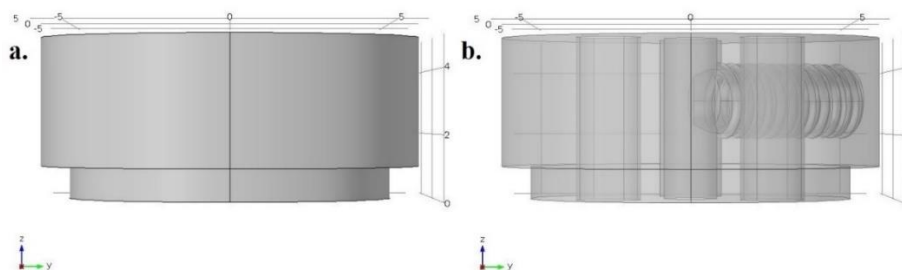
Schematic illustration of front view of upper part of prototype 8, (a. solid view, b. transparent view)
